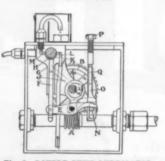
DOUBLE PUMP LUBRICATOR WITH ROTARY VALVE.
